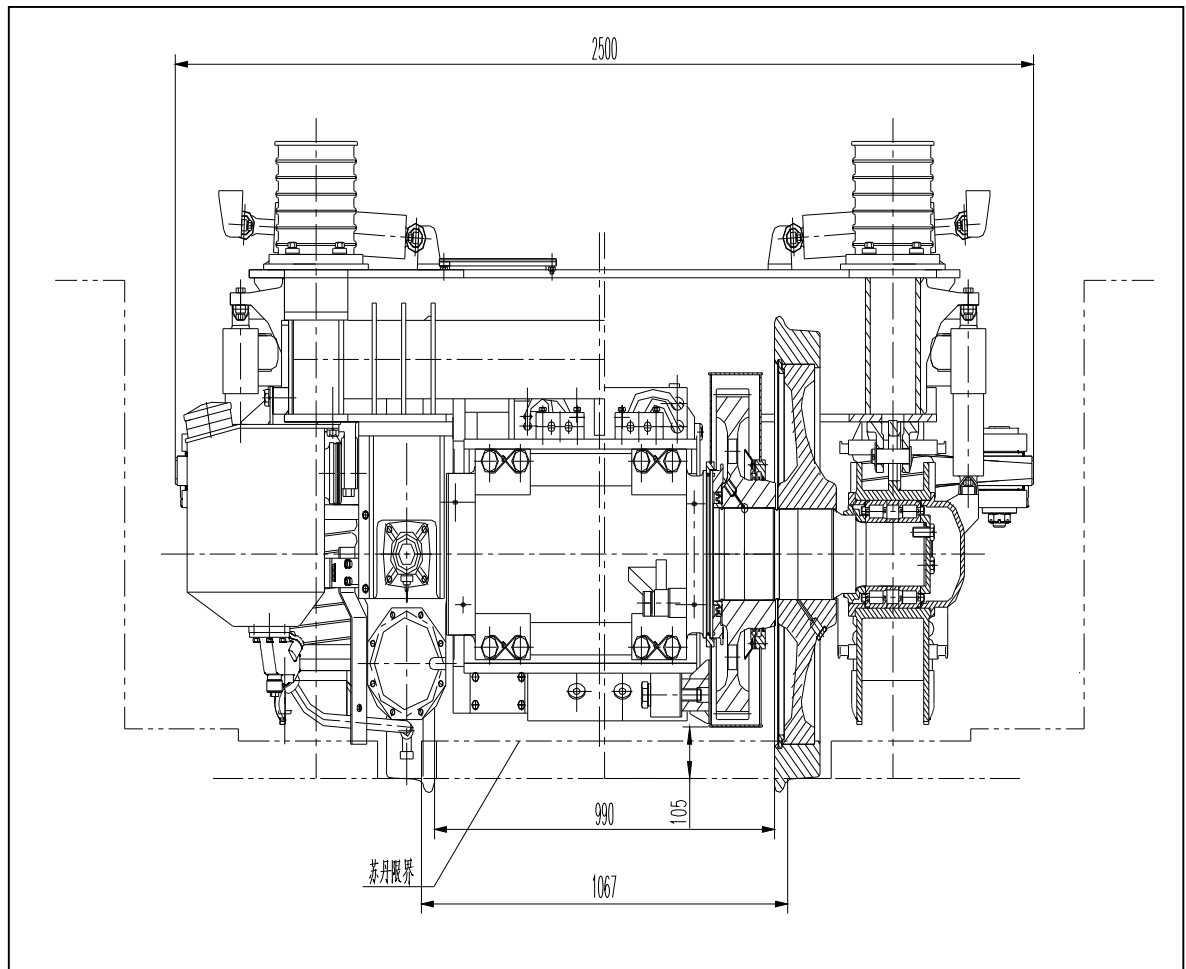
Bogie of SDD₁ diesel locomotive
